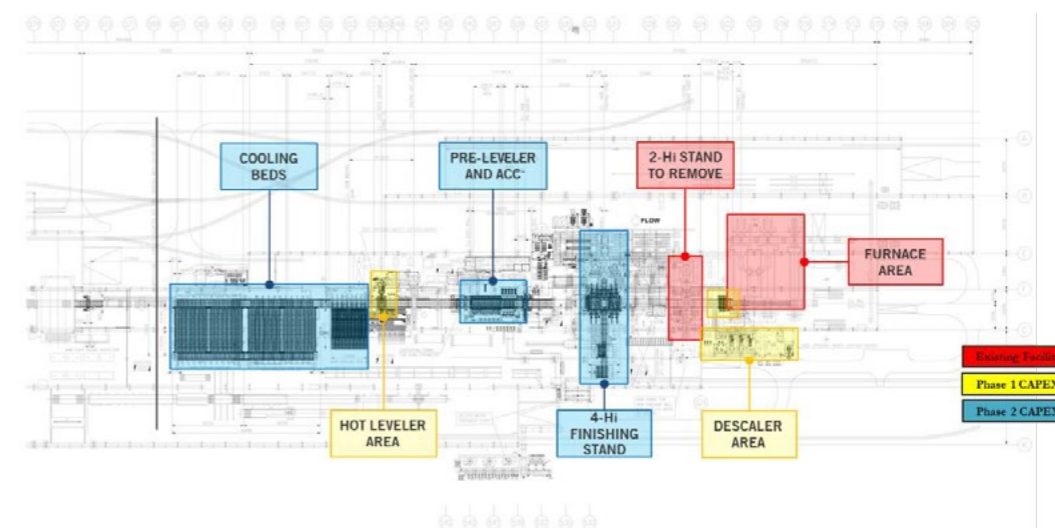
A: JSW Steel USA – Baytown Layout – Hot rolling area
